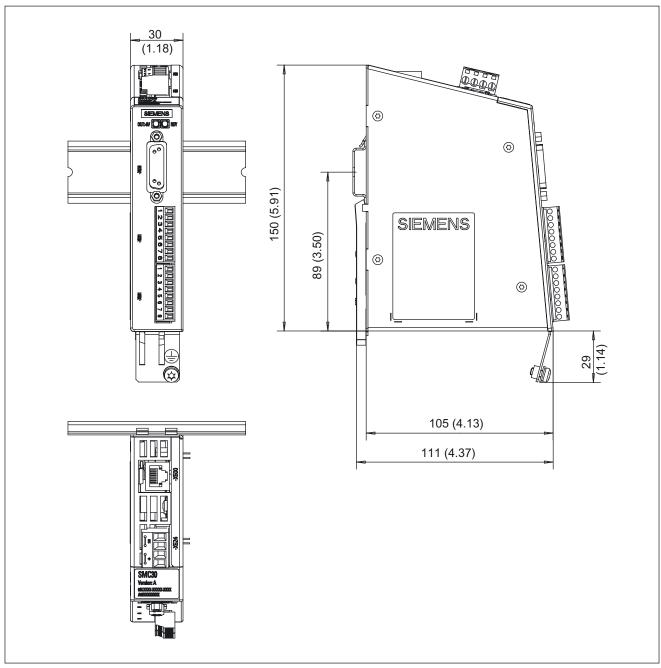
Dimension drawing SMC30: 30 mm wide
